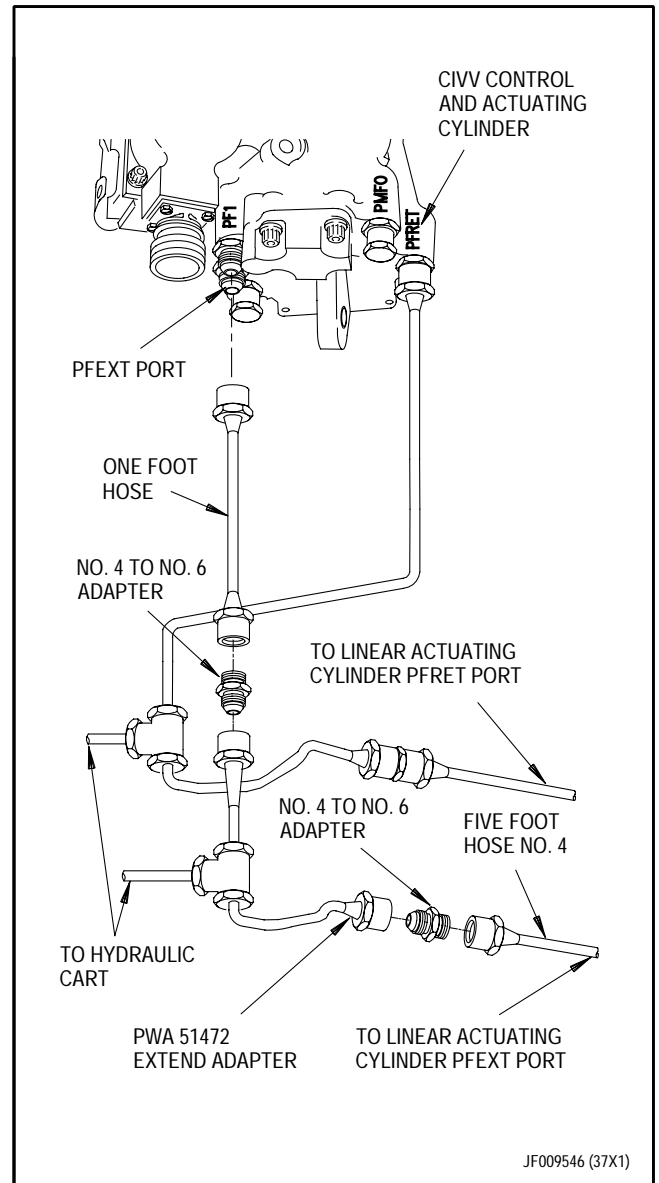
Compressor Inlet Variable Vane System - Tooling Installation (Sheet 2 of 3)
